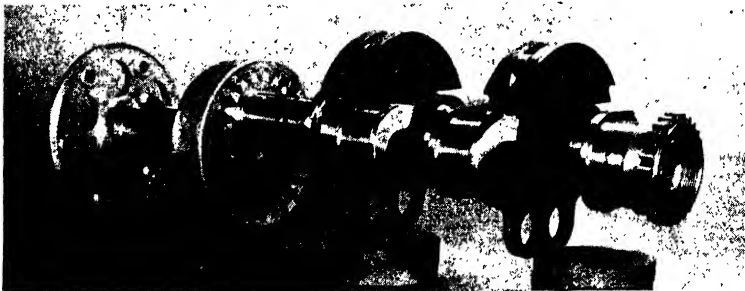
Crankshaft of a four-cylinder opposed engine, showing internal spur reduction gear and vibration-absorbing counterweights. (Lycoming Division of Avco Manufacturing Corporation.)
